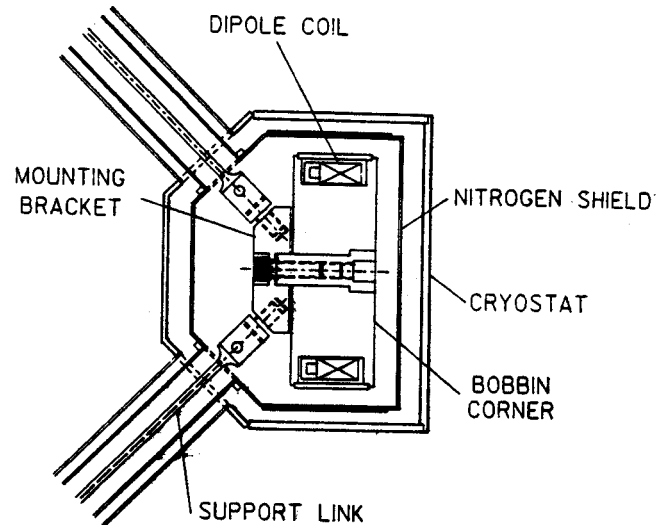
Bobbin cryostat corner section showing support link geometry.
